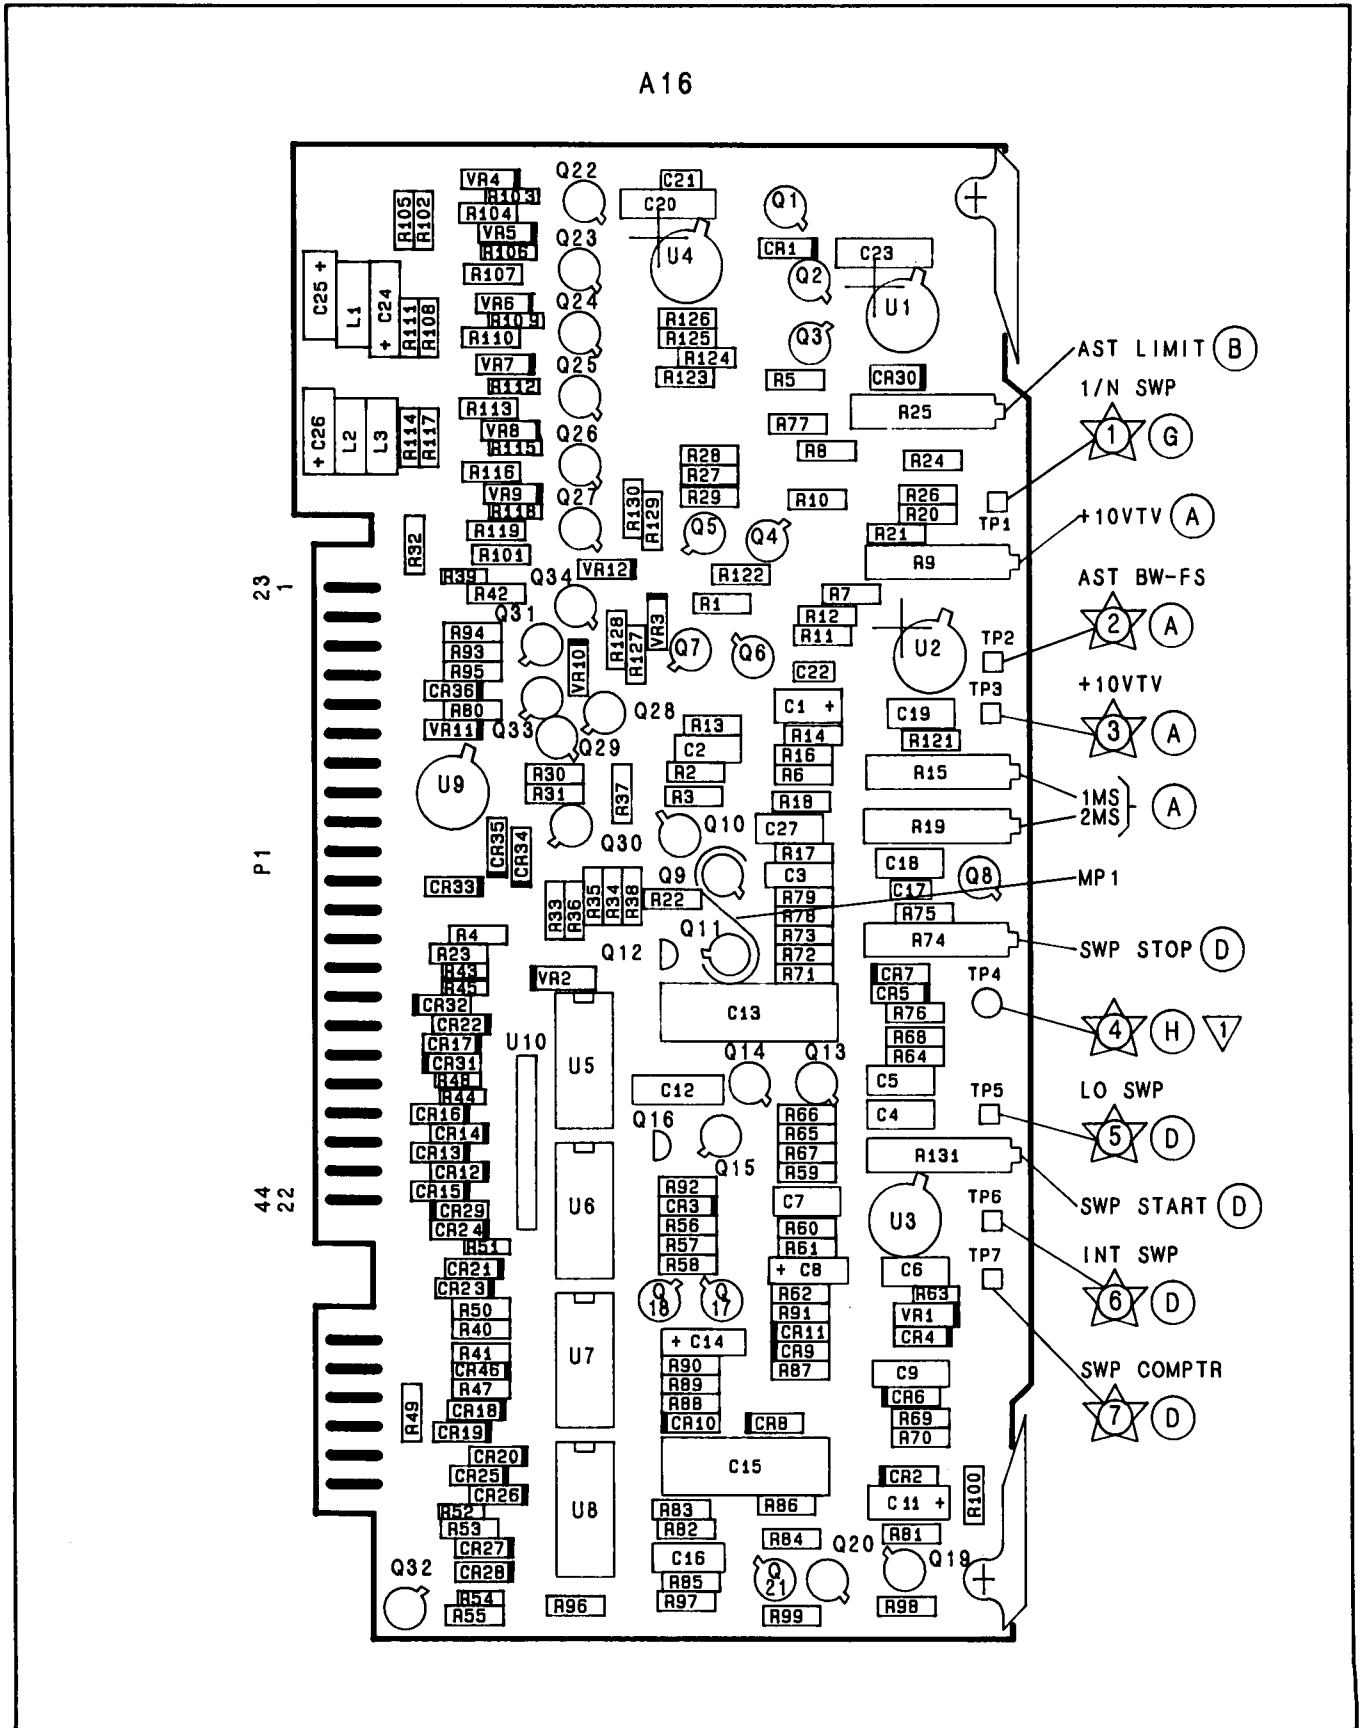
A16 Sweep Generator Assembly, Component Locations
